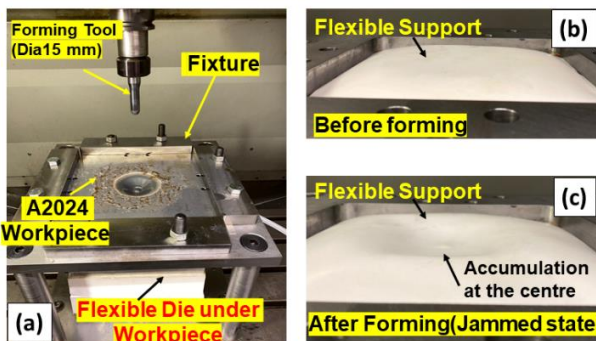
Experimental set-up for incremental sheet metal forming with flexible die
